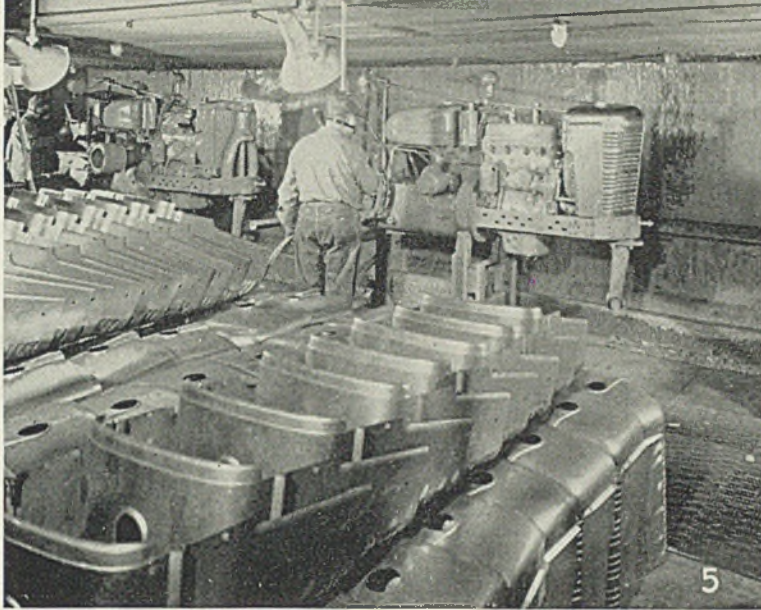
Still moving on the same chain conveyor, the tractors are spray painted
